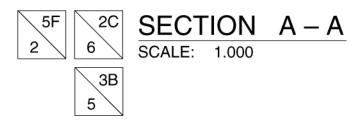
Example of Callouts of a Section, Detail, or View Used in Multiple Places
